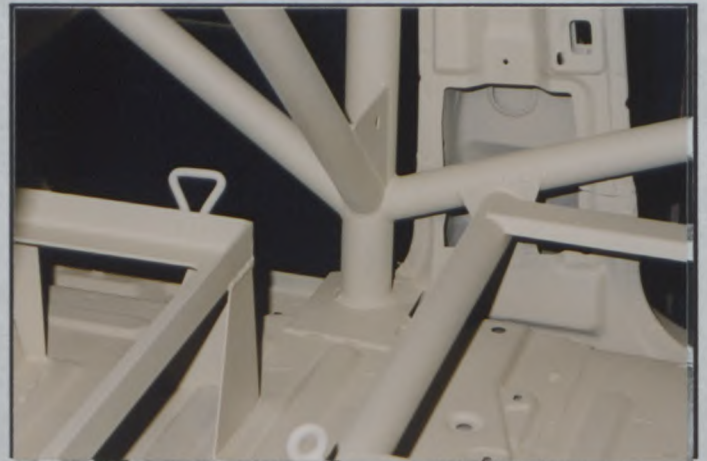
MAIN HOOP TO FLOOR-RIGHT
